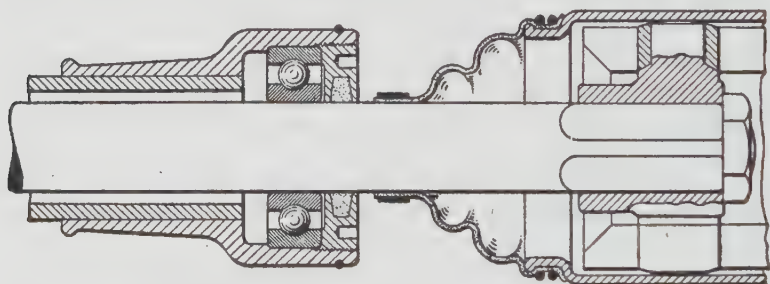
TORQUE TUBE RIDING ON PROPPELLER SHAFT.
